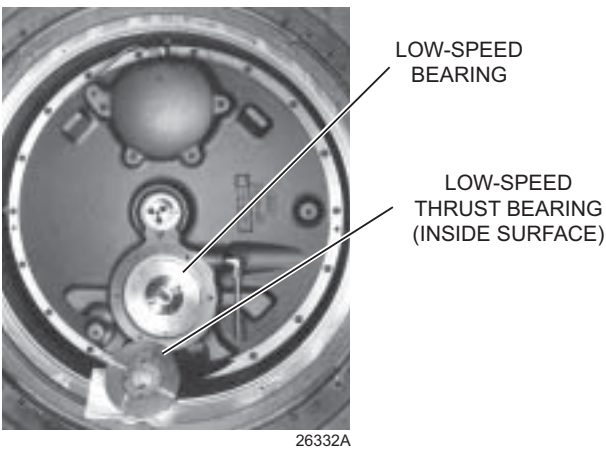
LOW-SPEED THRUST COLLAR REMOVED
